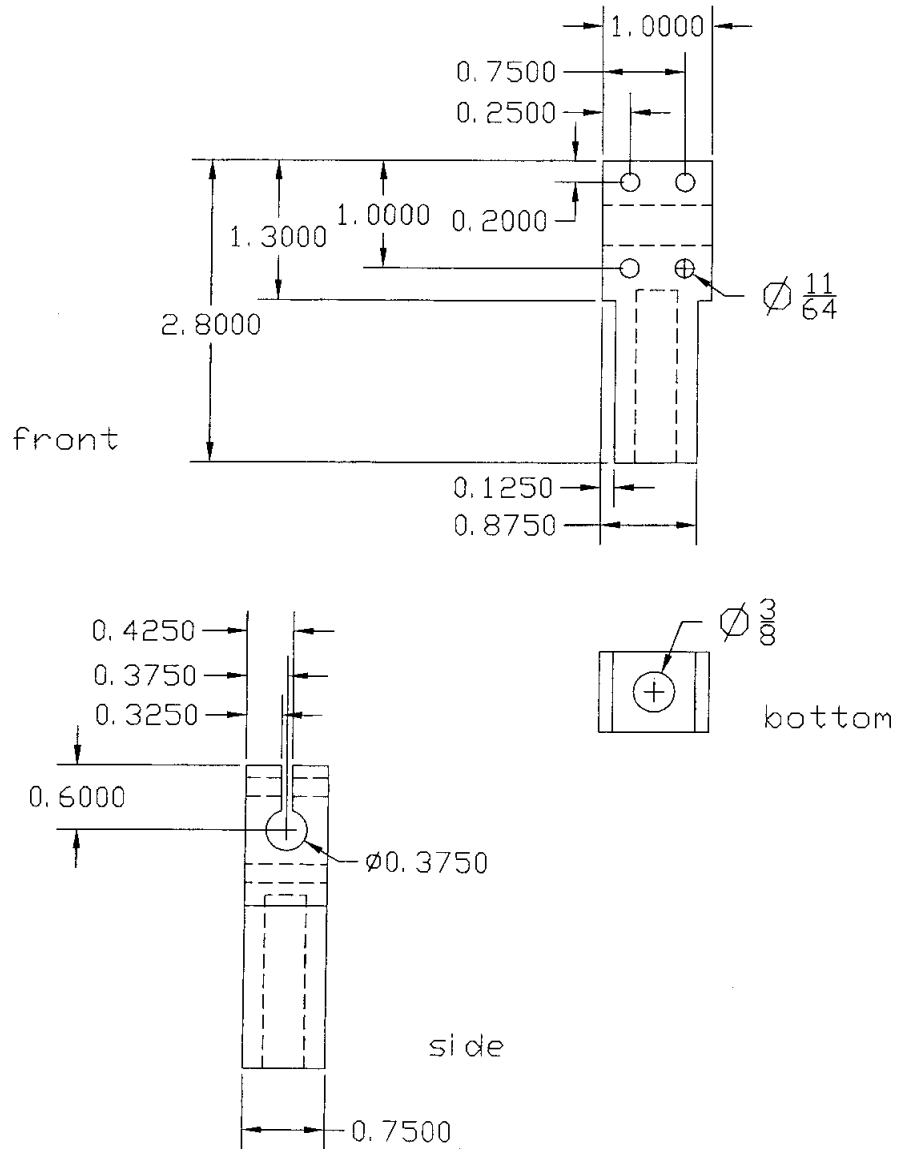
CAD details of the lower knees. All parts are machined from aluminum block.
